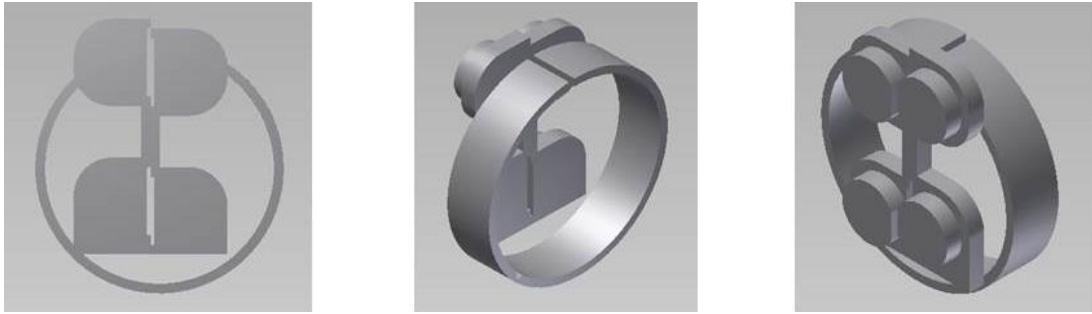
Front unit frame end cover which connects to a 12.9mm diameter generic bending section.
